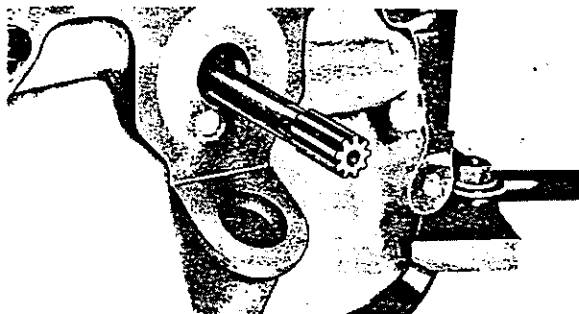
Accessory Drive Shaft Installed in Inlet Housing
